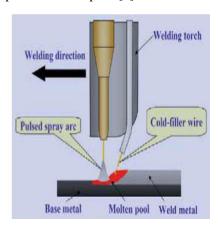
Principle of the cold tandem pulsed GMA welding process [6].
